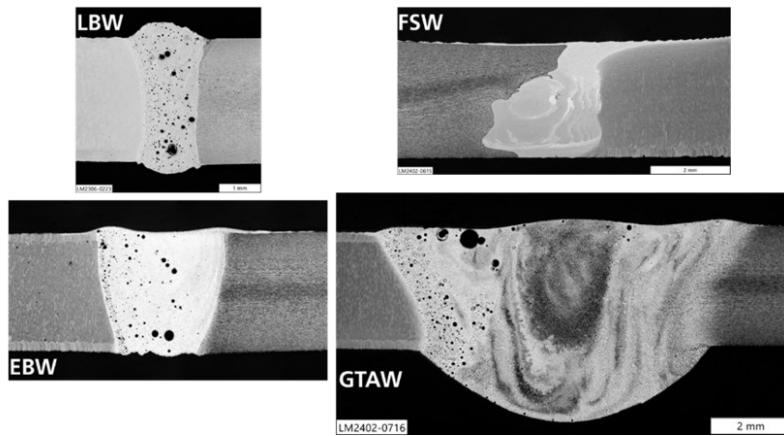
Cross sections of butt-joints between AlSi7Mg0.6 and EN AW-5083 with different welding technologies (Laser beam welding –LBW, Friction stir welding – FSW, Electron beam welding – EBW, Gas tungsten arc welding – GTAW)
